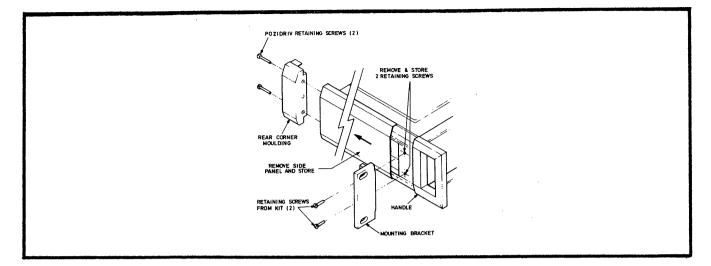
Fitting the Fixed Rack Mounting Kit
